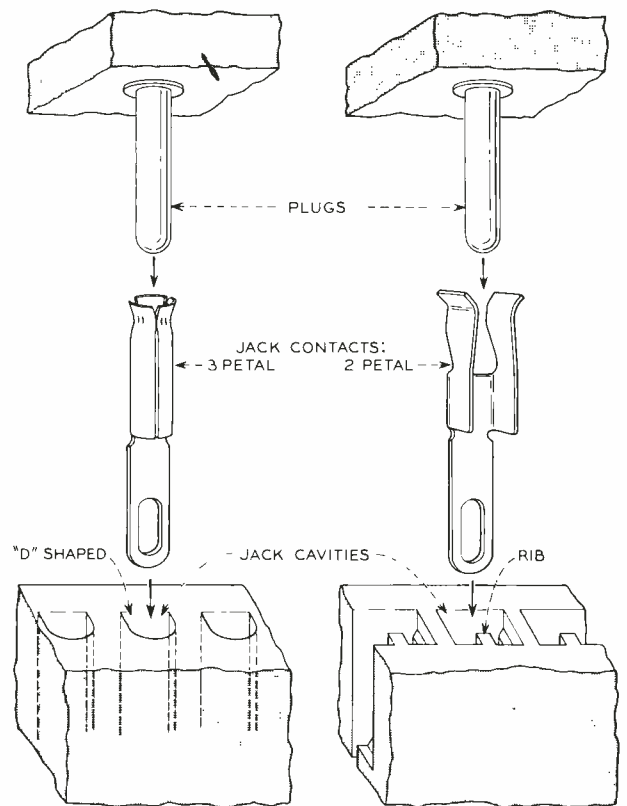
Large-scale drawing showing details of jack contacts and jack cavity structures for old and new types of multiple-contact connectors.
